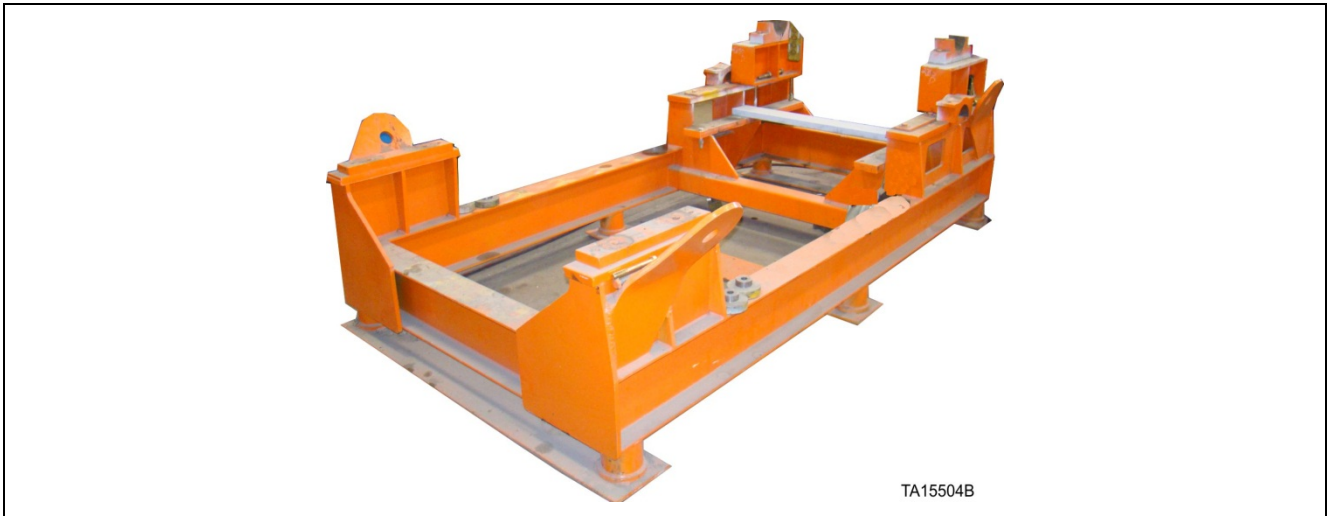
Typical Engine/Generator Assembly Stands L1850/L2350 - Stand (P/N R1032750)
